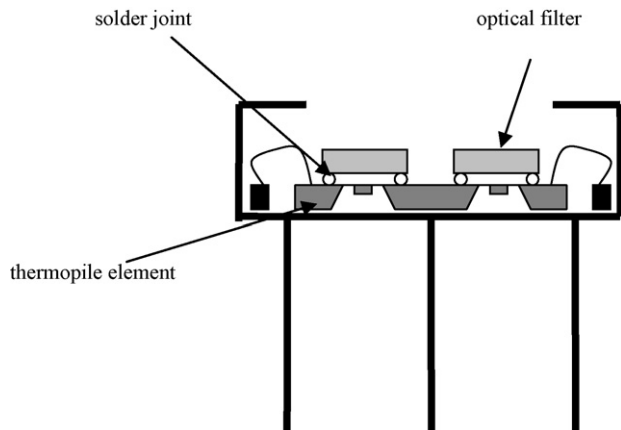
Schematics of the detection unit in a TO8 package, with thermopile elements, optical filters, and solder joints.
